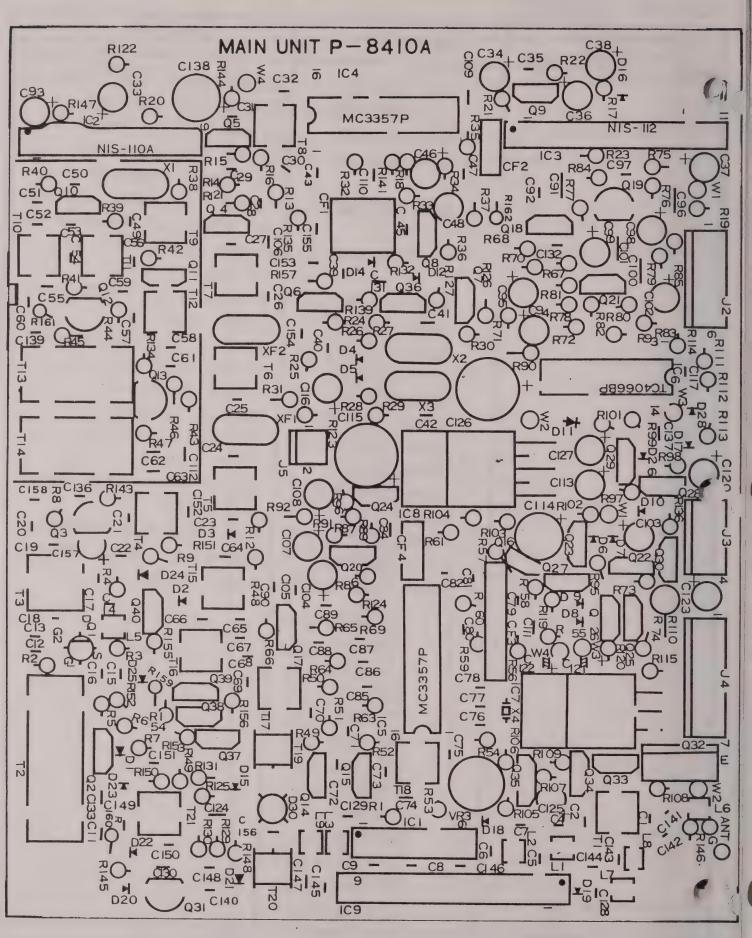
Parts Placement Diagram, Main Board, MX7000.
